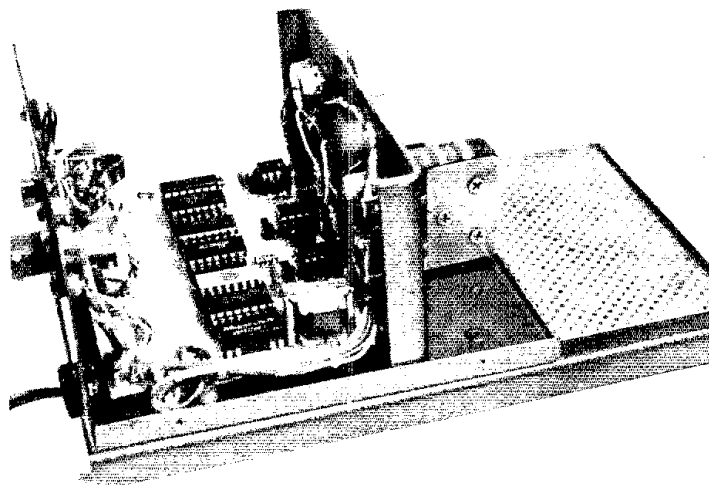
Inside view of the touch keyer. Note perf-board construction and chassis, as explained in text.
